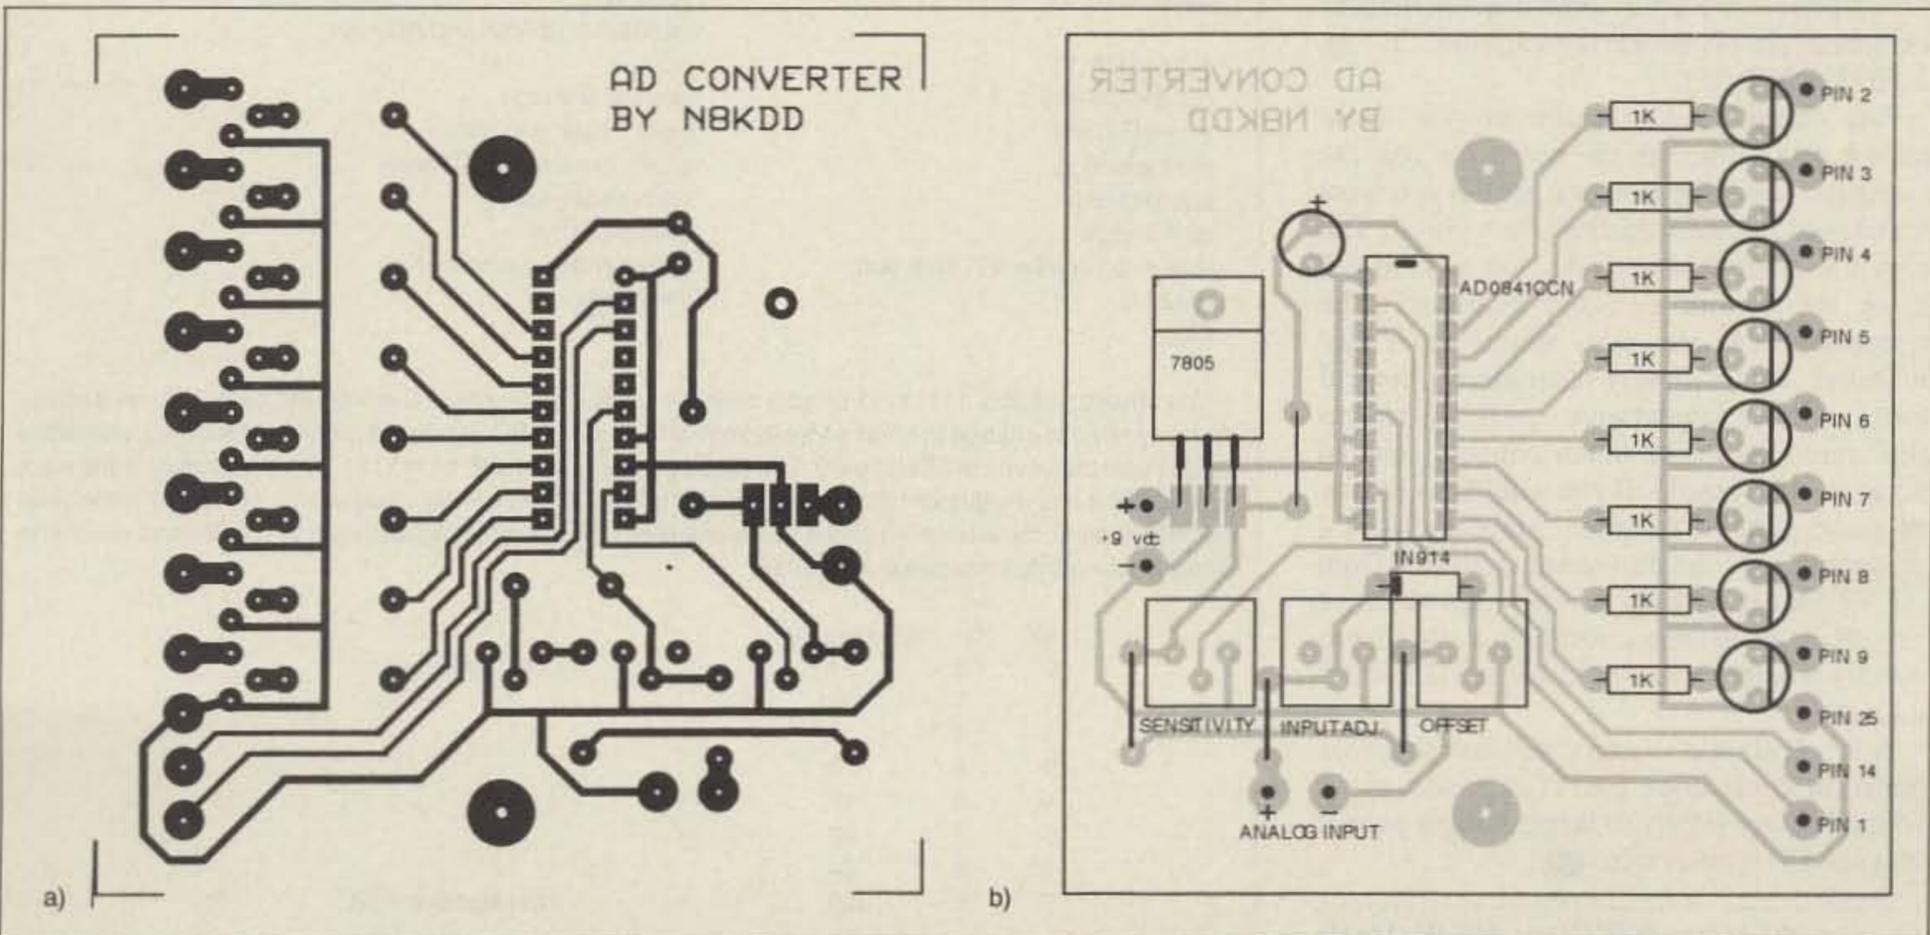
(a). PC board foil pattern. (b). Parts placement.
